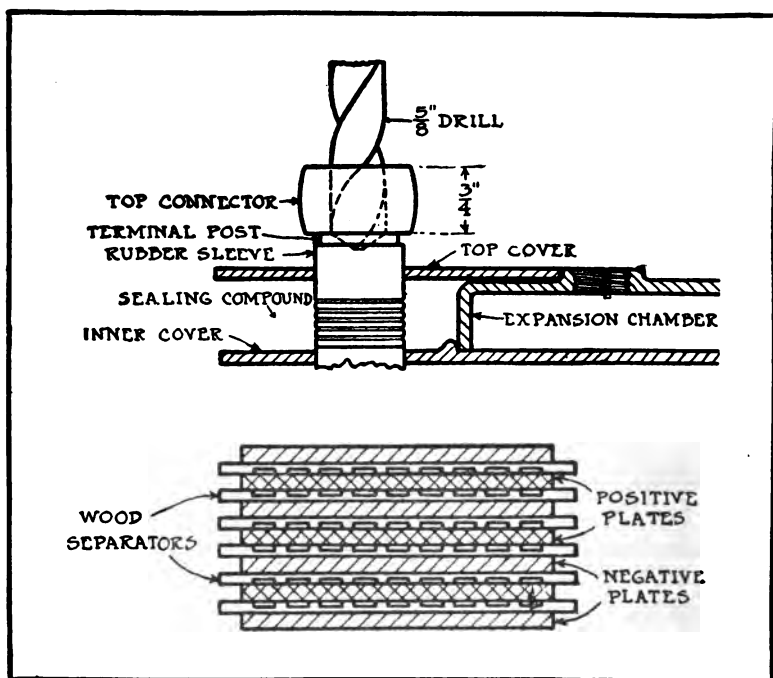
Method of Drilling Into Terminal Post of Willard Battery and How Plates and Separators are Assembled.
